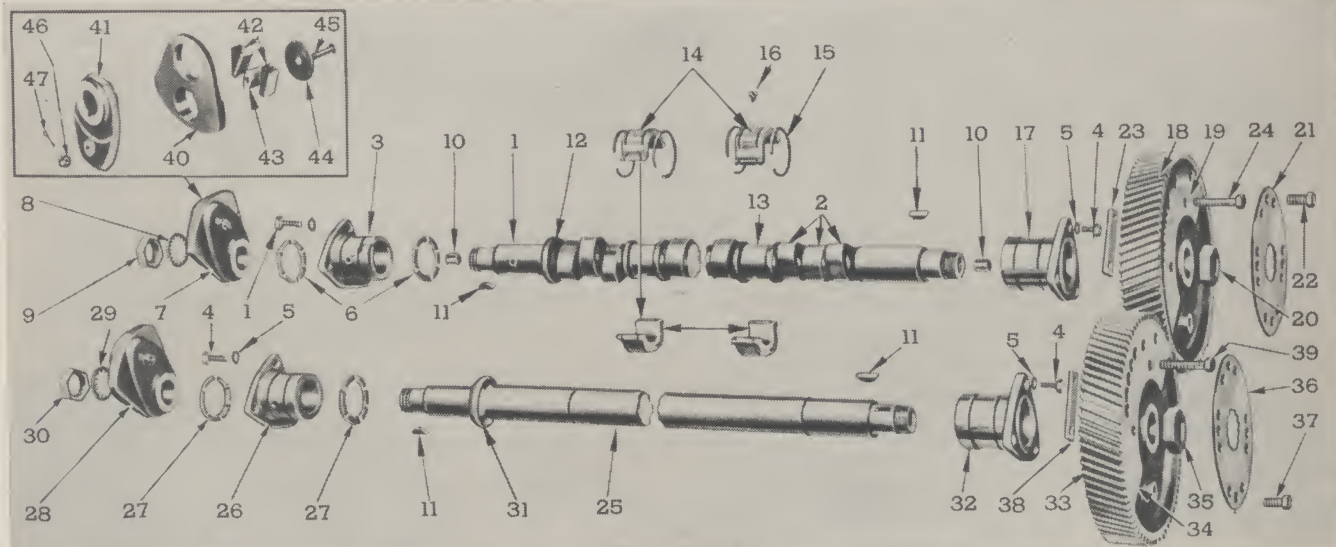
B—A GM engine showing details of camshaft (1) and balance shaft (25). Camshaft intermediate bearings (14) which are removed when removing the camshaft are locked in cylinder block with set screws (16). Set screws are accessible after removing cylinder head. Spring loaded front balance weights (7 and 28) are used only on 6 cylinder engines whereas one-piece balance weights are used on all other engines.
